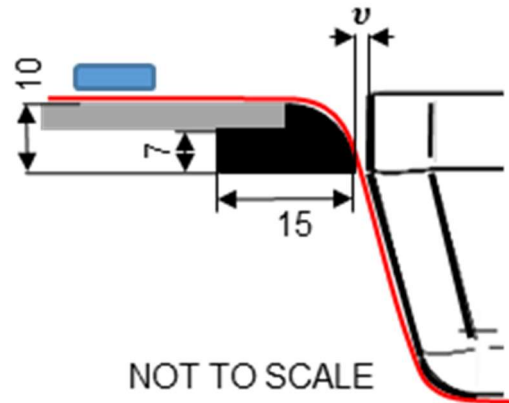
Cross section of the radial insert and forming bed showing the 3D printed radius bonded to the forming bed occlusion.
